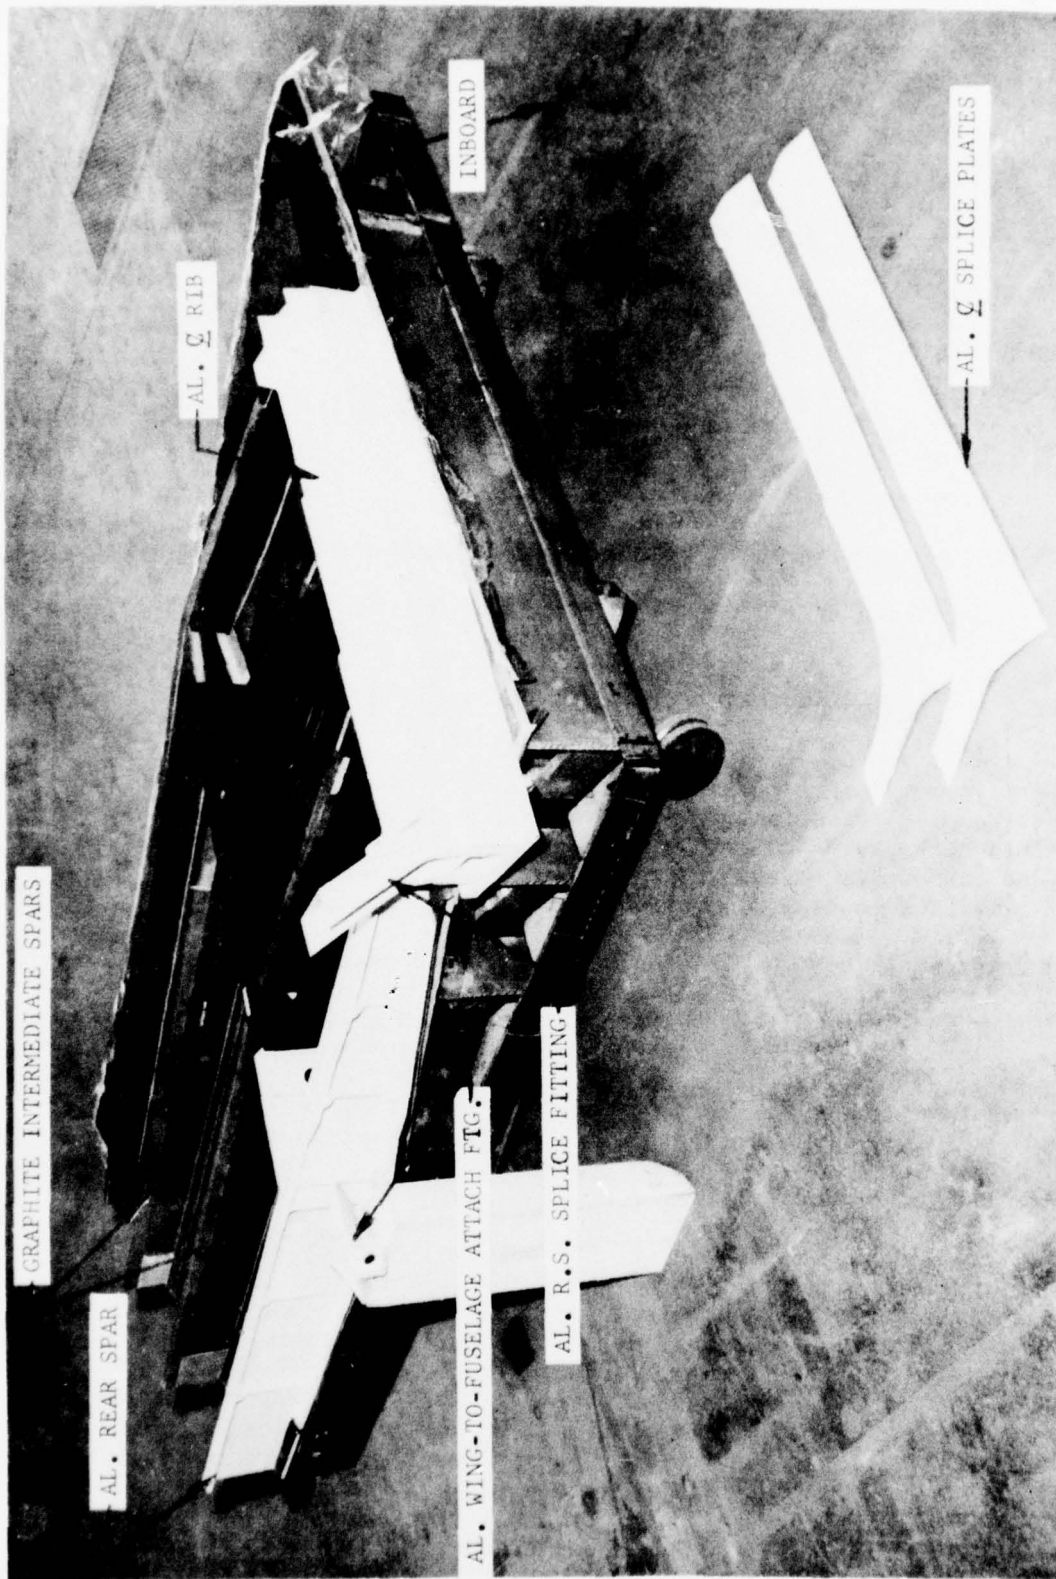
DETAIL PARTS - COMPOSITE WING CENTER SECTION SPECIMEN
